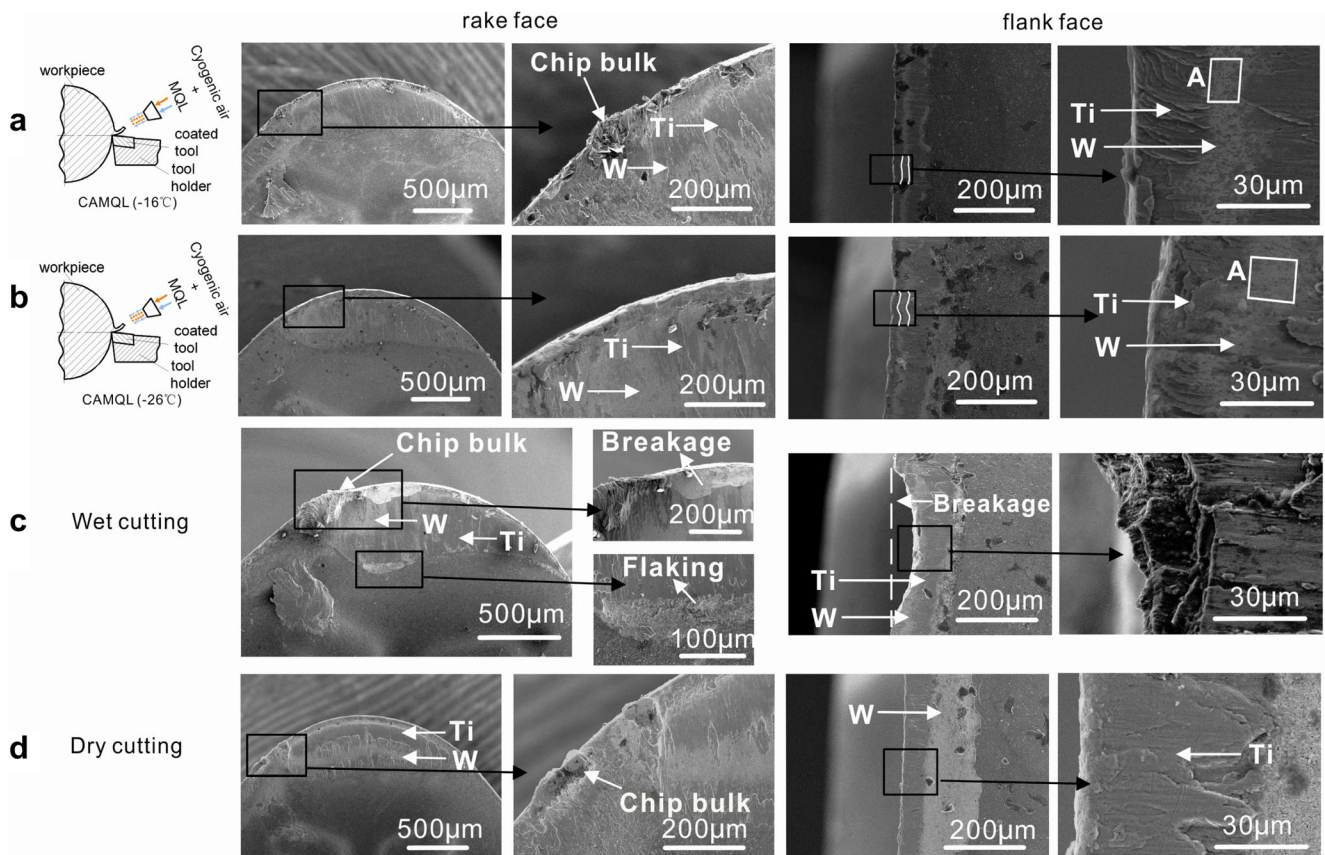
Rake wear morphology of cutting tool under a CAMQL at -16°C , b CAMQL at -26°C , c wet cutting, and d dry cutting conditions ($v_c=90\text{ m/min}$, $f=0.25\text{ mm/r}$, $a_p=1\text{ mm}$; cutting distance, 360 m)
